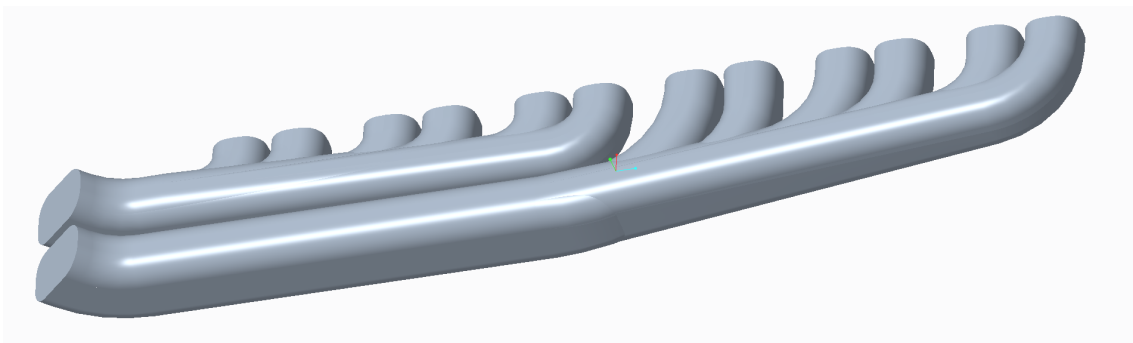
CAD of Dual Pipe Exhaust Manifold
